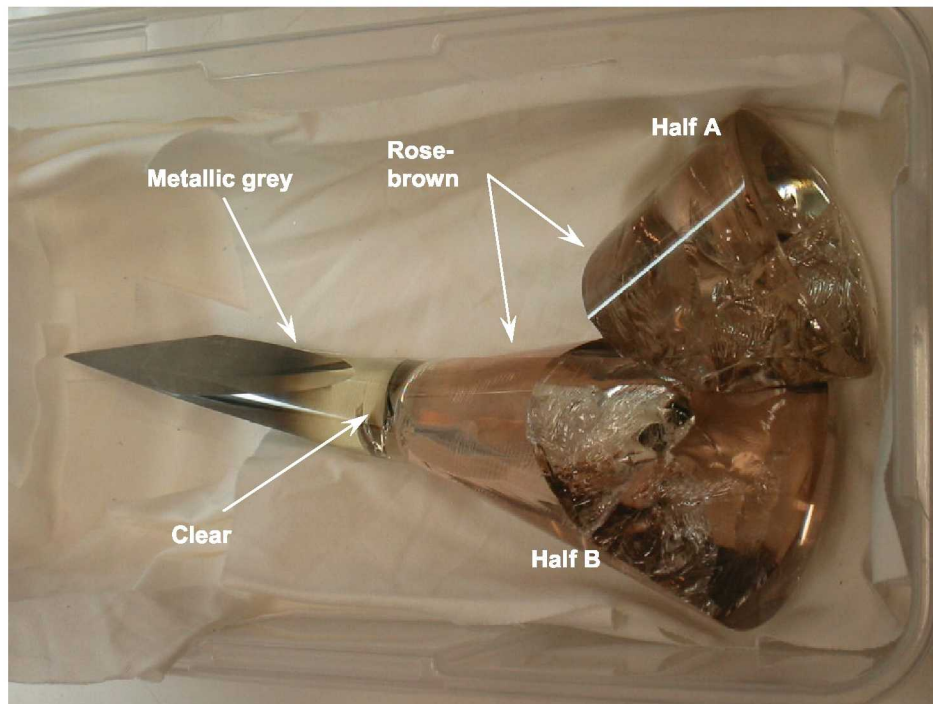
RSC no. 2 after removal from the test rig. It has broken into two pieces. Cracks at the neck are also visible. The cracks in the neck and extractor are extensions of the main fracture in the cone body. The lens diameter is 89 mm (3.5 in.) and the overall length is 284 mm (11.2 in.).
